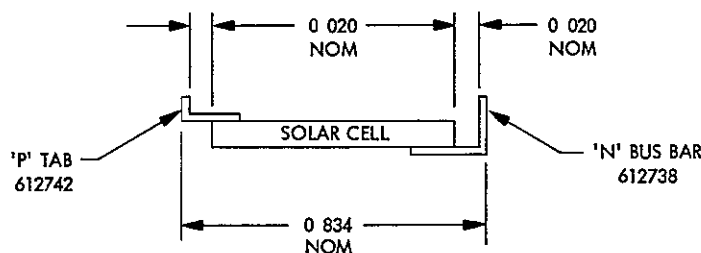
Submodule subassembly before welding (Ref. 18)
